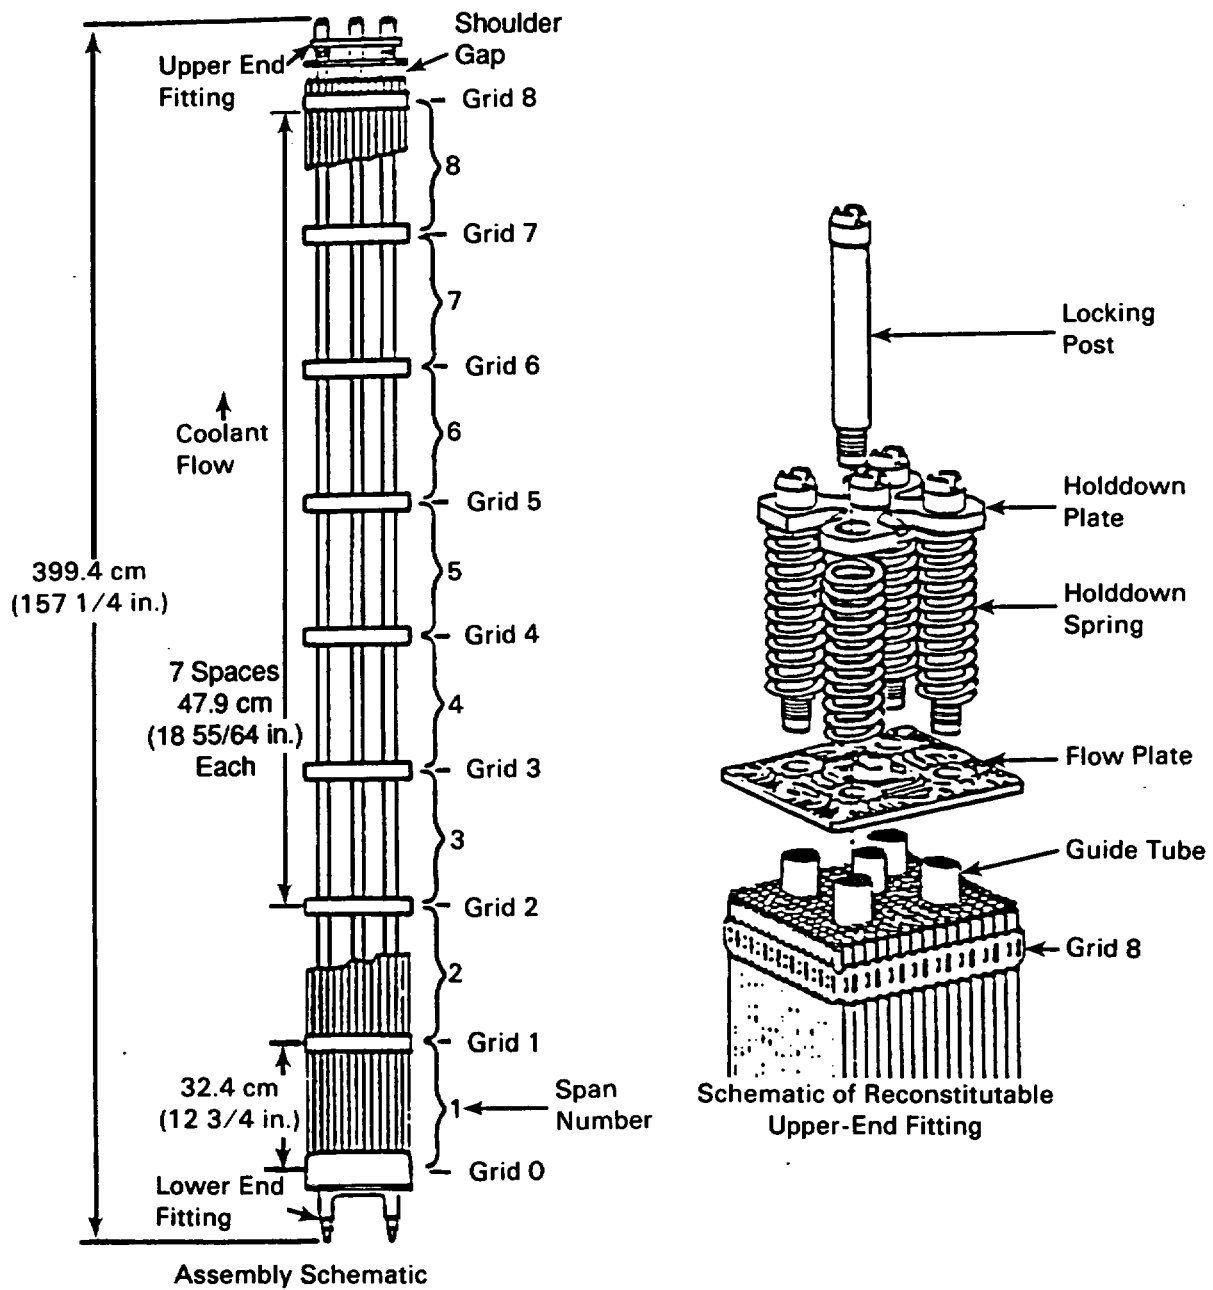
Combustion Engineering 14 x 14 Fuel Assembly Schematic
